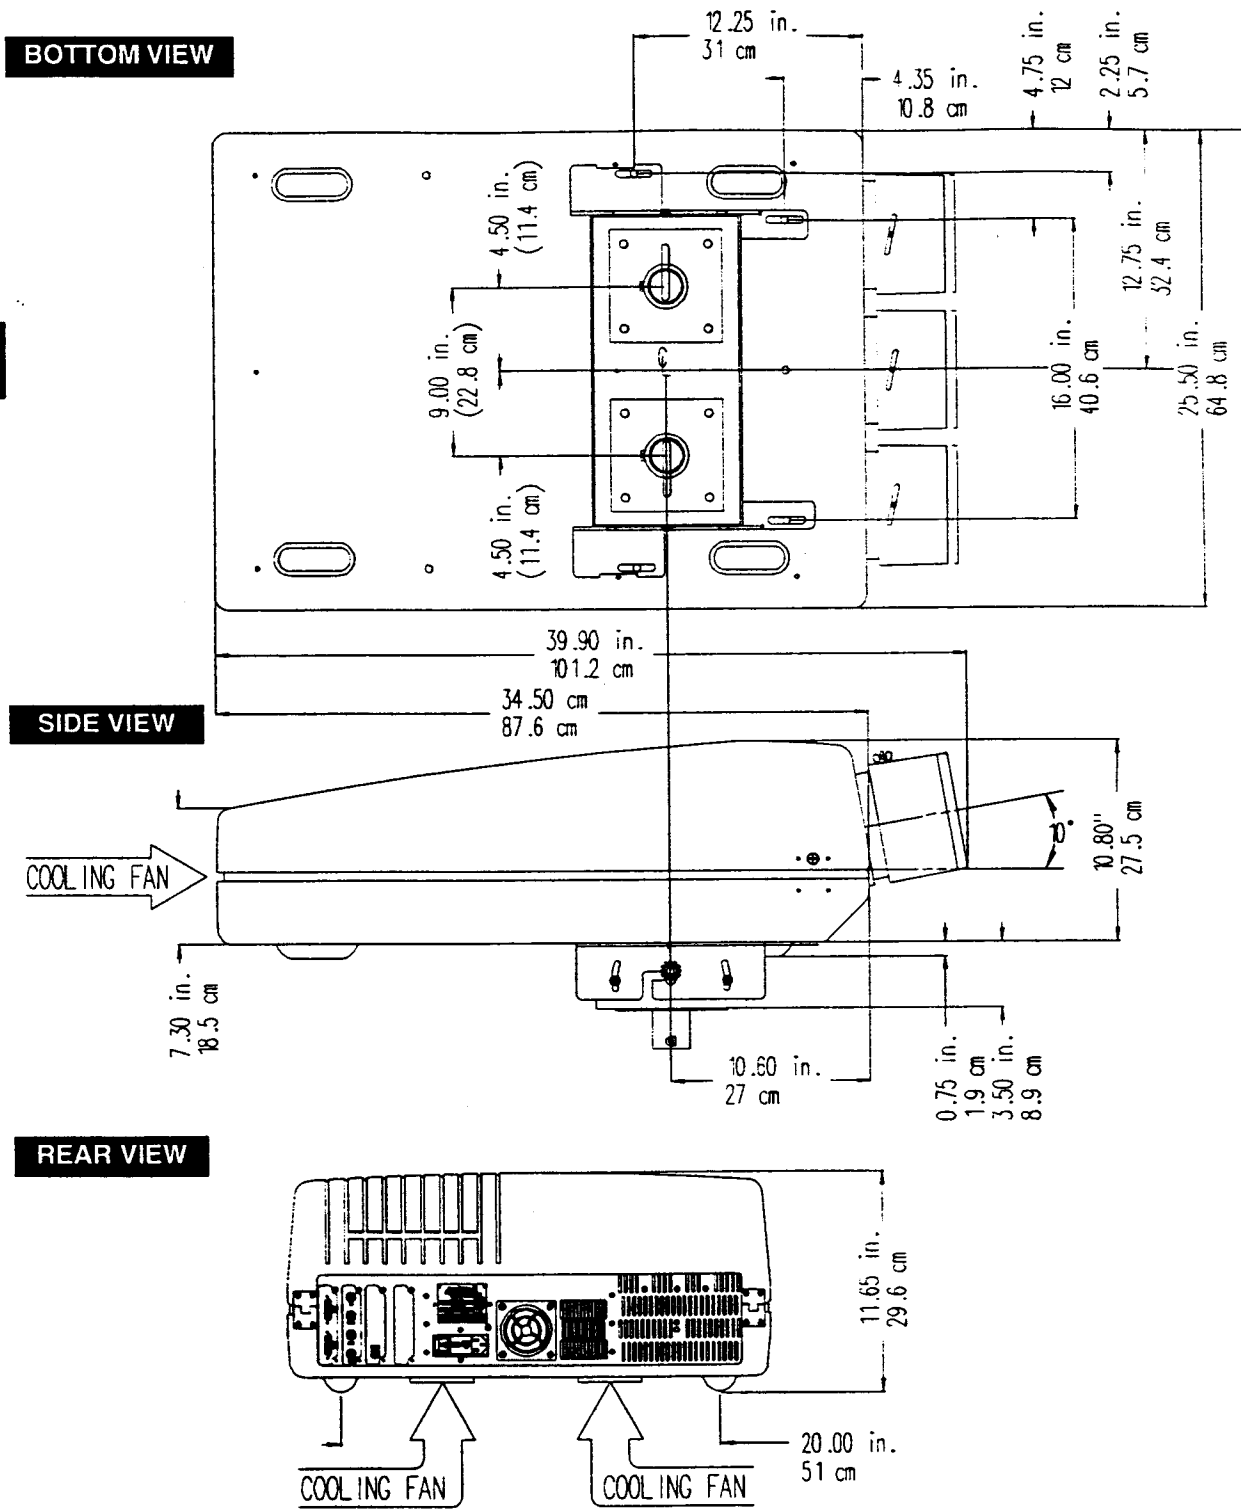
AMPRO 3600 CASE DIMENSIONS.
